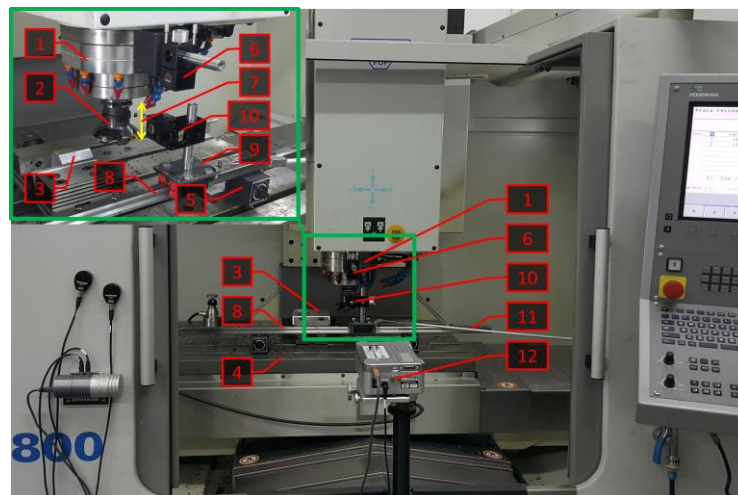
Schematic of device for measuring displacements in the tool-workpiece system: 1- spindle, 2 - milling head, 3 - workpiece, 4 - table, 5 - magnetic base, 6 - linear reflector, 7 - vibrations in the tool-workpiece system, 8 - rail, 9 - block, 10 - linear interferometer, 11 - link, 12- XL 80 laser.
